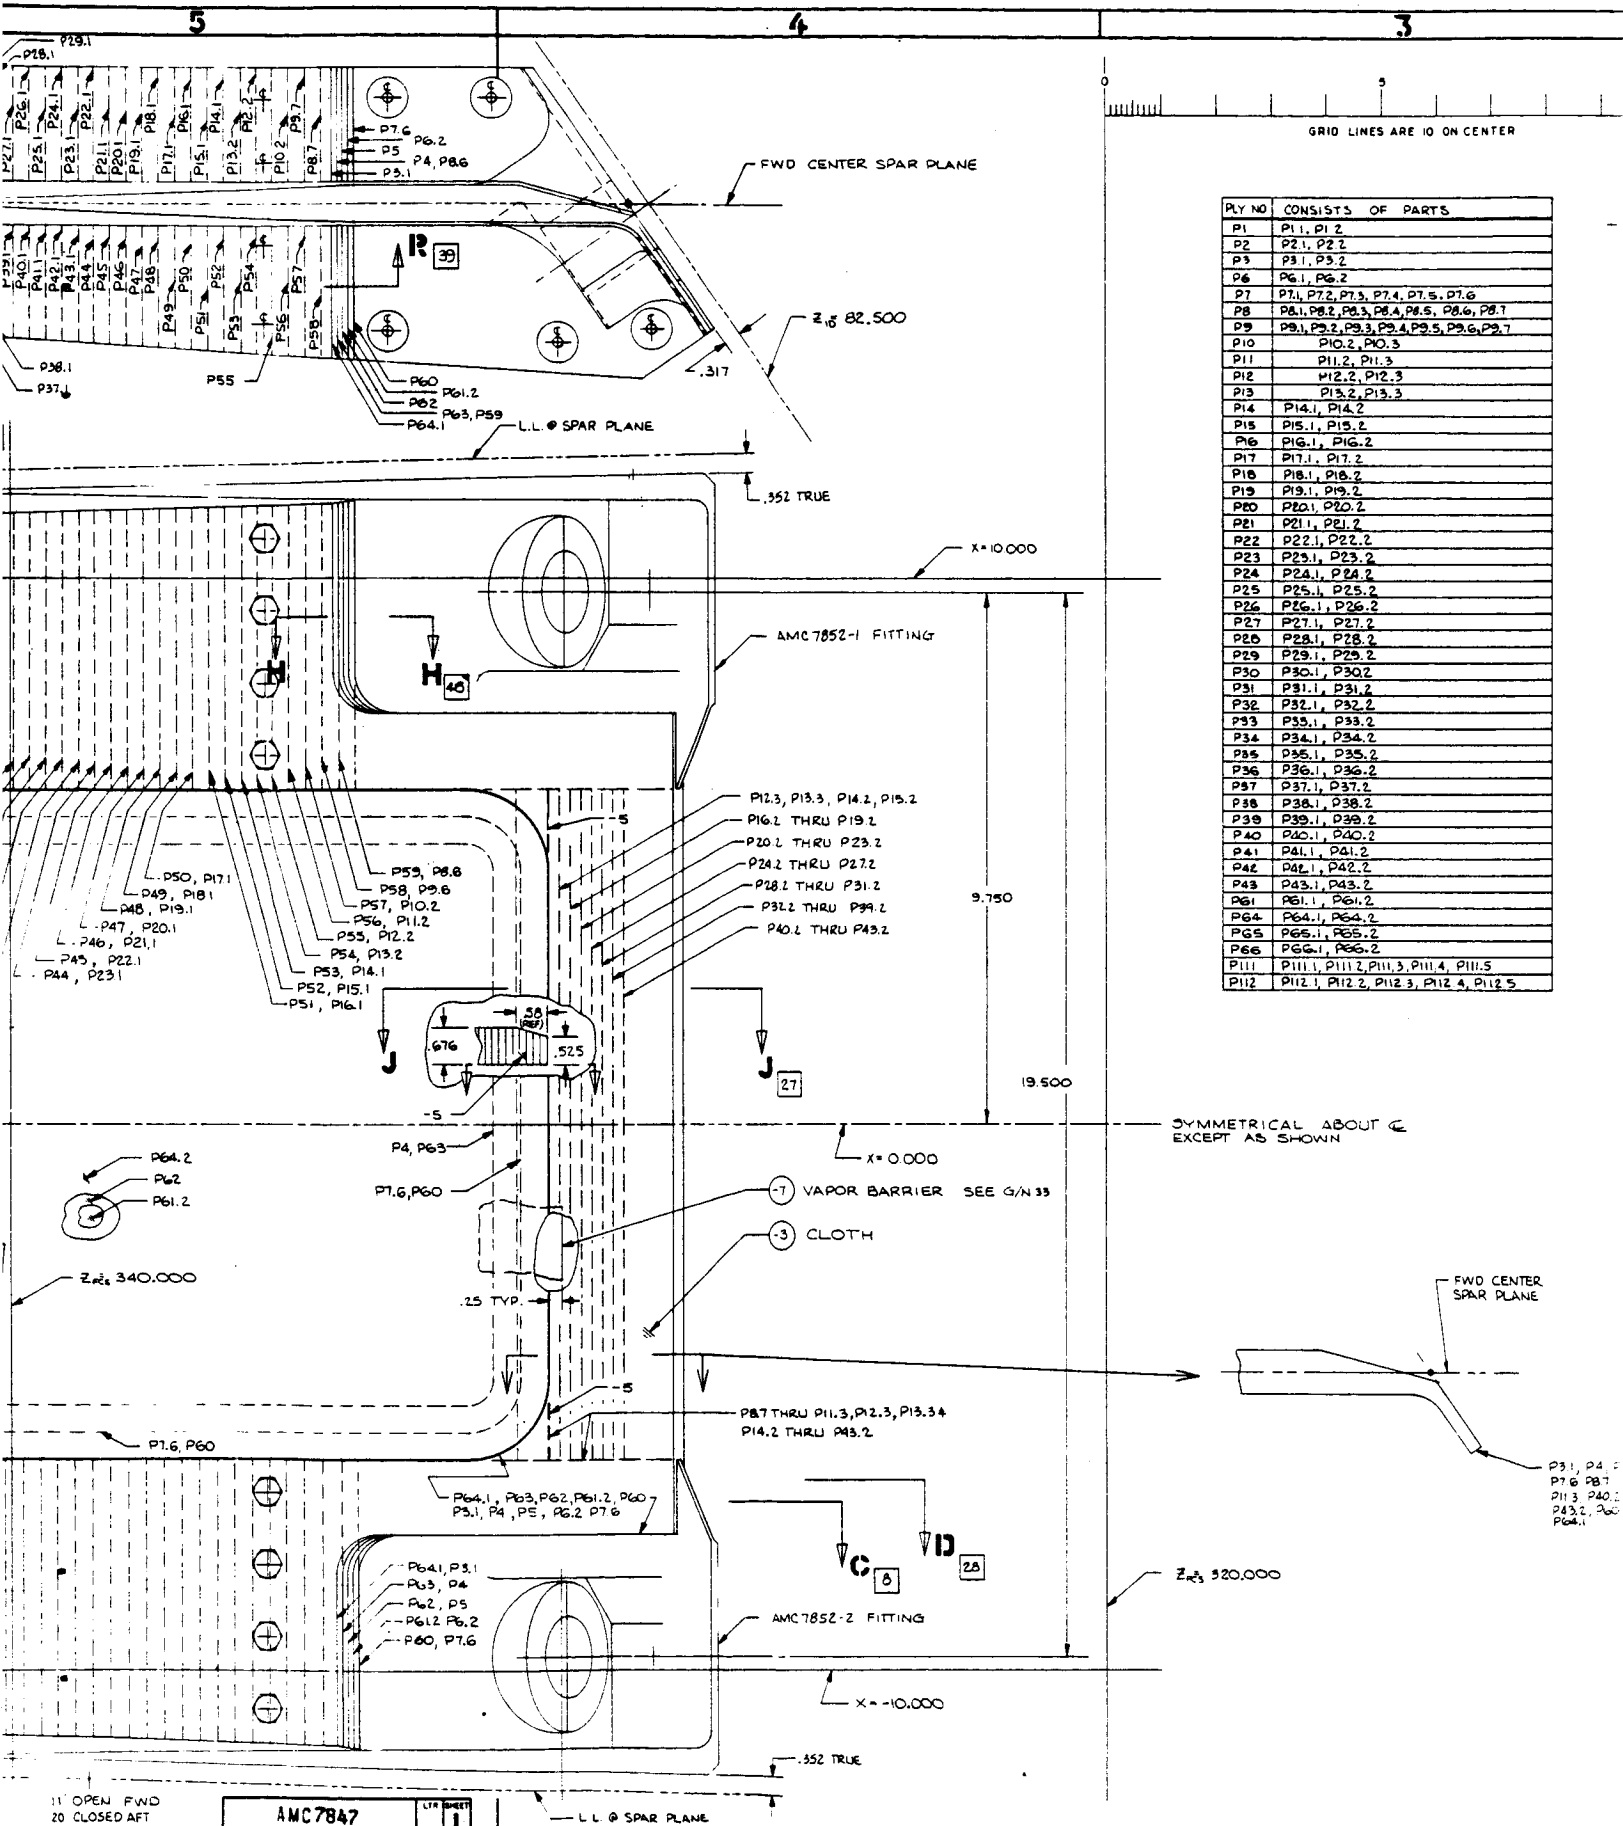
DRAWING AMC7847 - FORWARD CENTER SPAR ASSEMBLY (SHEET 1 OF 10)
